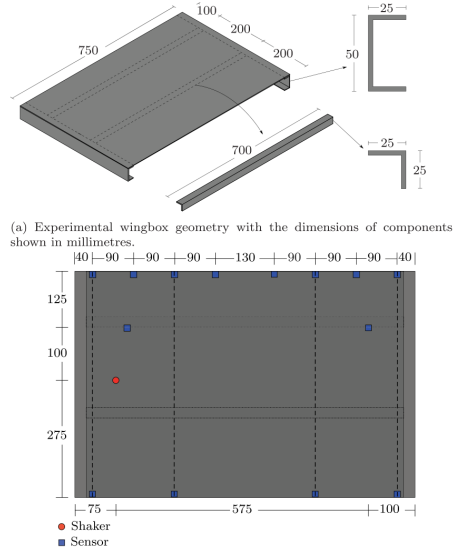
Schematic diagrams of the experimental wingbox panel showing geometry, dimensions, sensor and shaker locations. Reproduced from Hollins et al. [2026].
